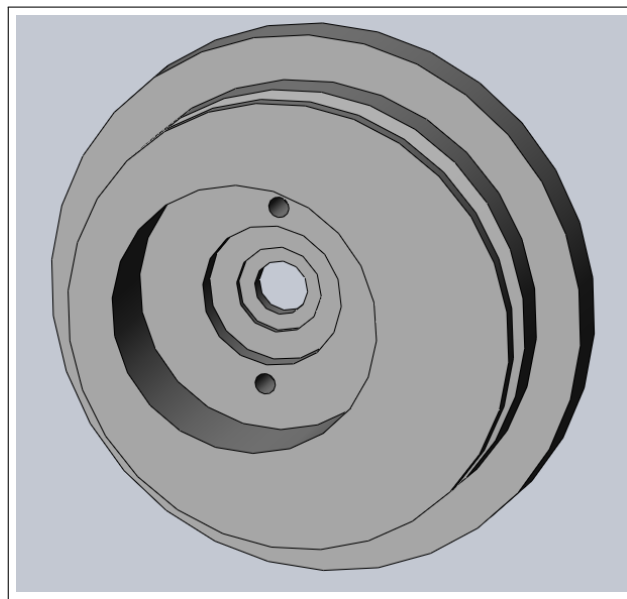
Solidworks rendering of end cap with o-ring seal and integrated motor mount for drive motor
